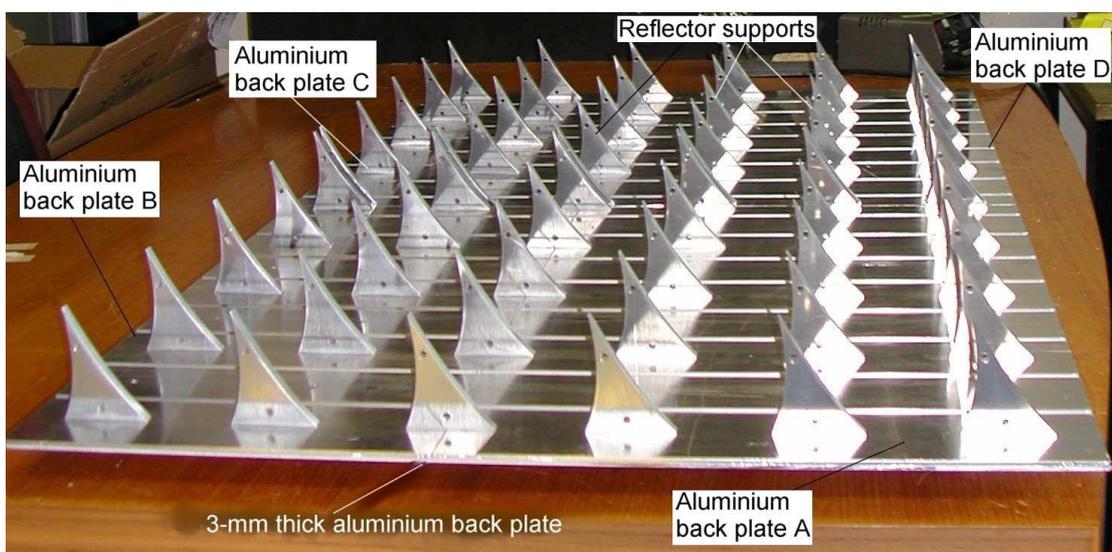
Reflector supports placed on the rear aluminium back plate.
